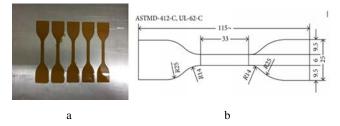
a – specimens which has fully filled the mould of the sample according to ASTM D412; b – dumbbell-shaped rubber specimen as per ASTM D412 standard
